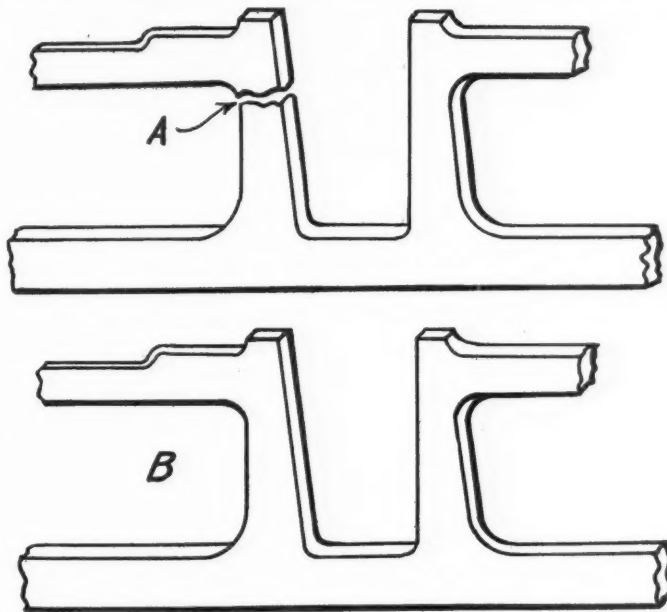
Method of Welding Ordinary Front End to Frame.
